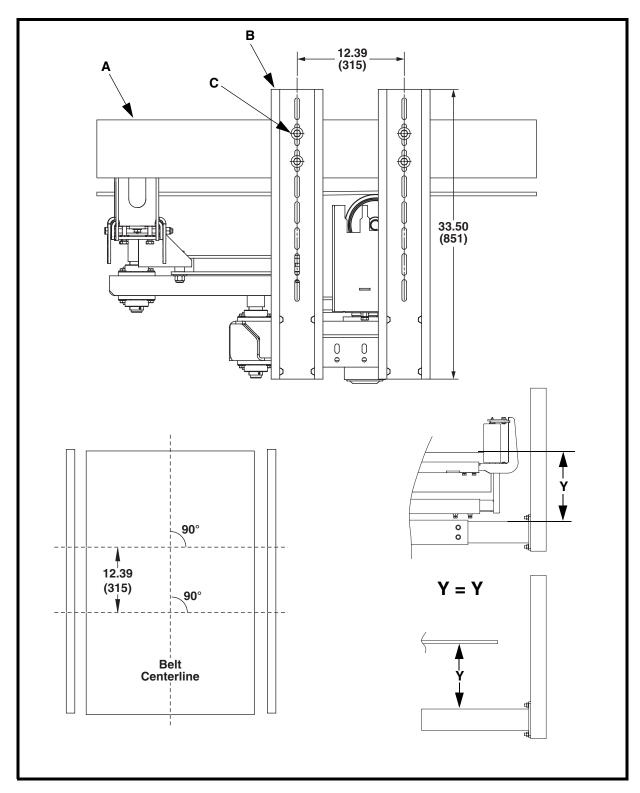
Mounting Dimensions–Martin<sup>®</sup> Tracker<sup>TM</sup> Monster (Lower Unit)
